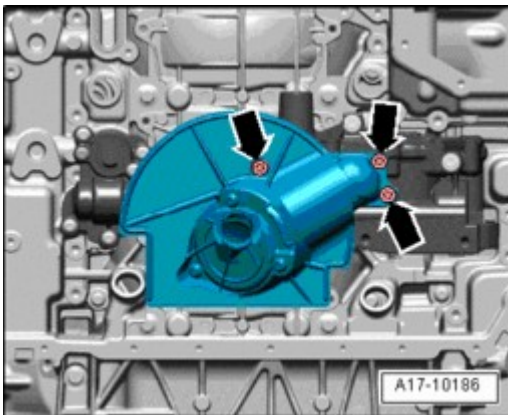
Removing Bolts And Intake Tube With Oil Baffle
